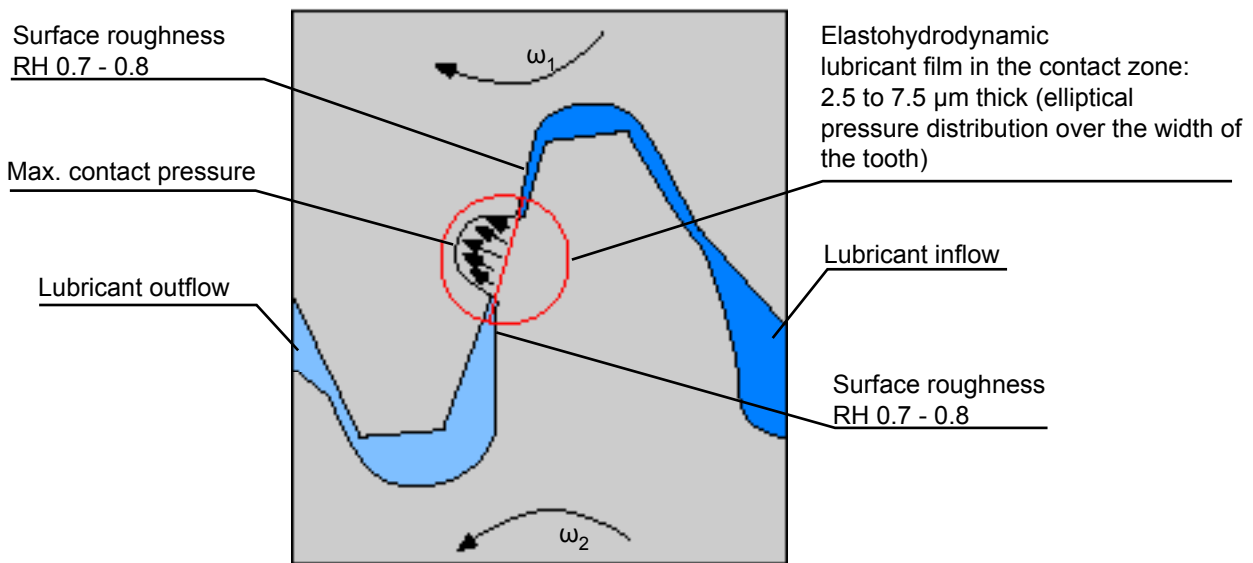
Lubrication of a spur gear: the lubricating film serves to transmit the force between the driving gearwheel and the gearwheel being driven.
